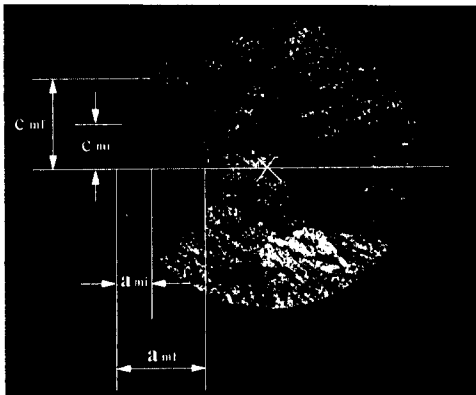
Photograph of fractured cross section showing fatigue crack development
